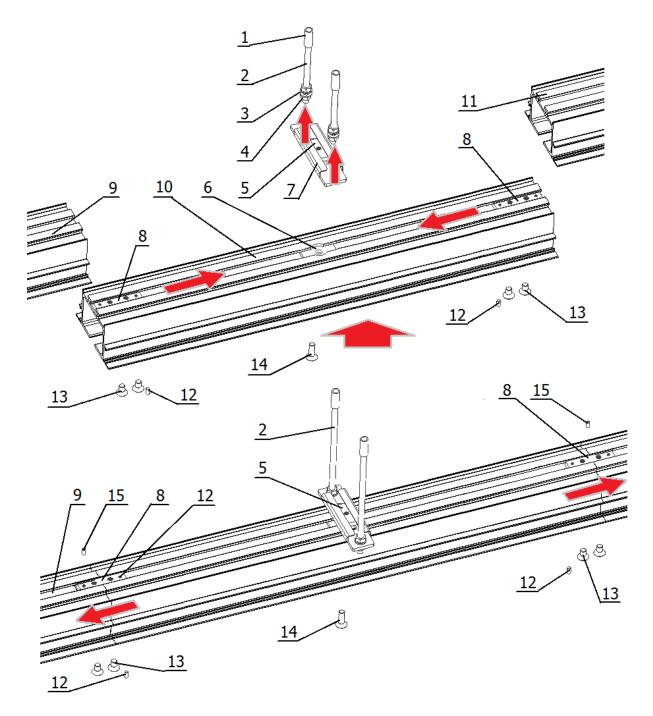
Assembly diagram of the service module for tracks 34-0150 and 34-0151 6 - unthreaded plate
